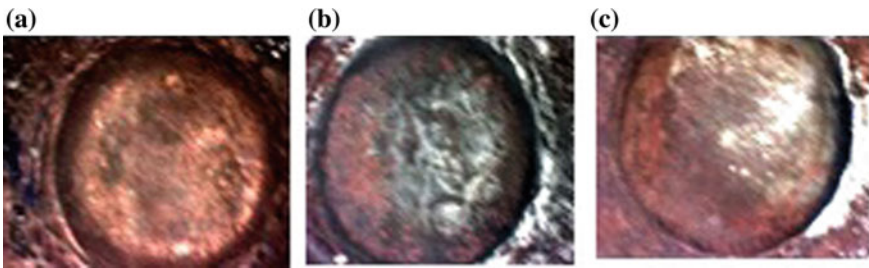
Machined surfaces by ACT at a 11 V, b 13 V and c 15 V
